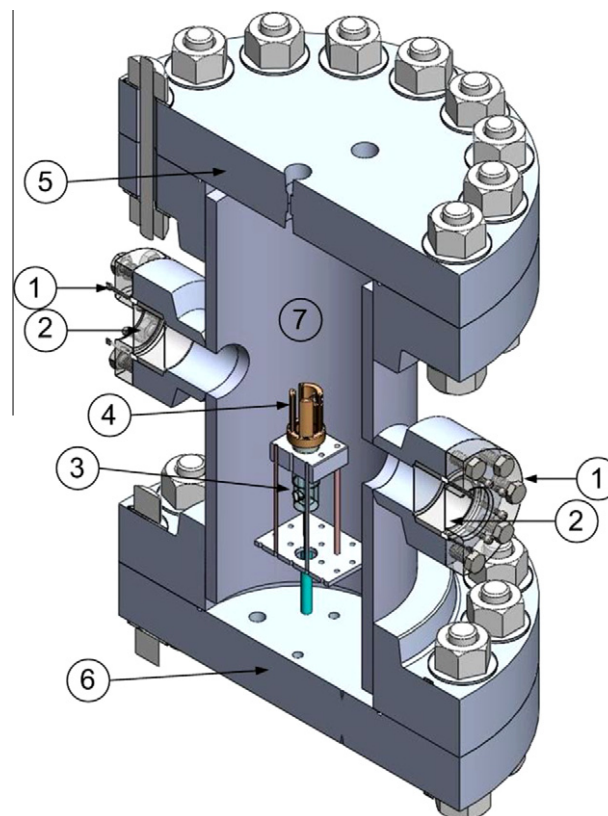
A cutaway view of the high-pressure chamber: 1 – optical access ports; 2 – quartz windows; 3 – burner assembly; 4 – Chimney assembly; 5 – upper flange housing the exhaust, safety valves, and pressure transducer; 6 – lower flange housing air, fuel pipes and wiring; 7 – combustion chamber.
